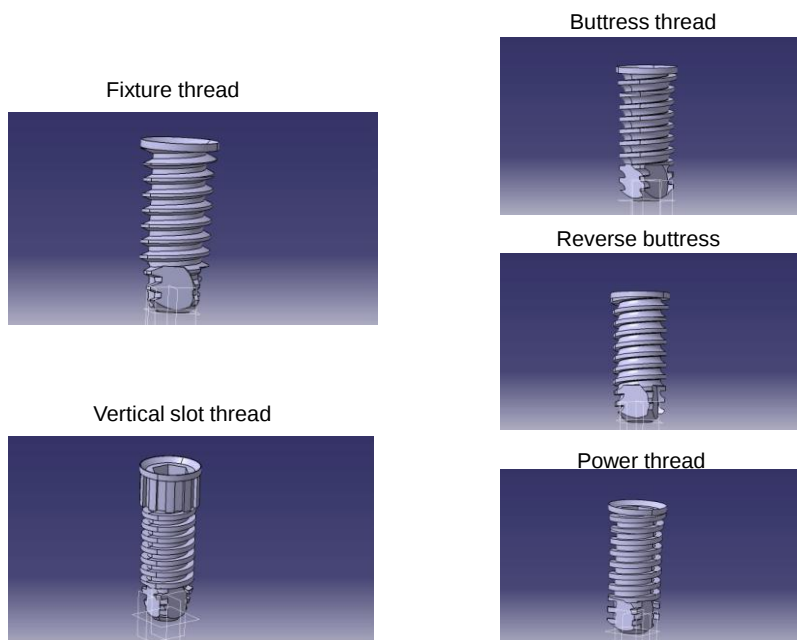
Although fixture thread is common thread design, there exist several others; some examples of different thread designs are demonstrated.
